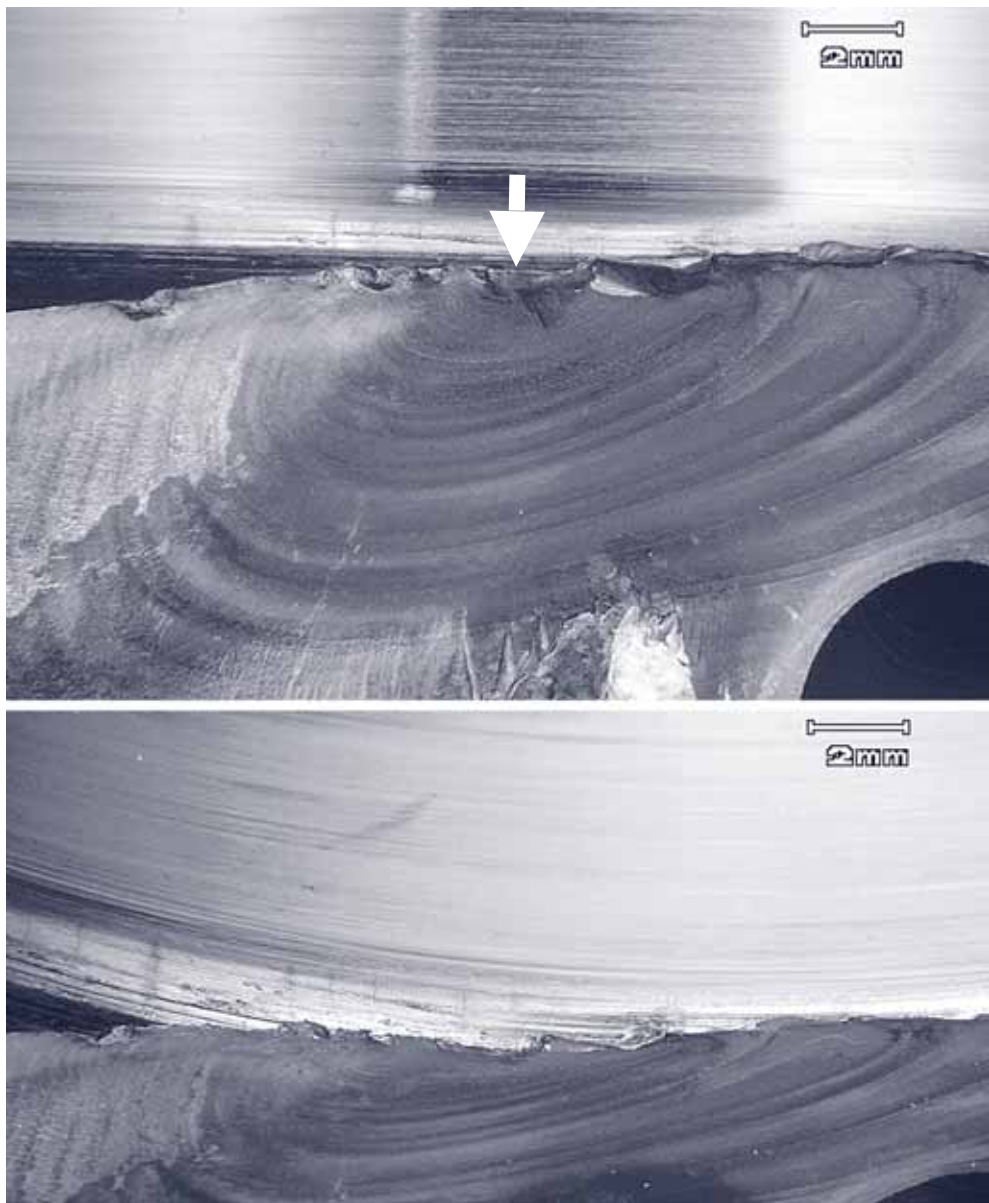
Crankshaft Web Fracture, No.4 main/No.4 connecting rod
